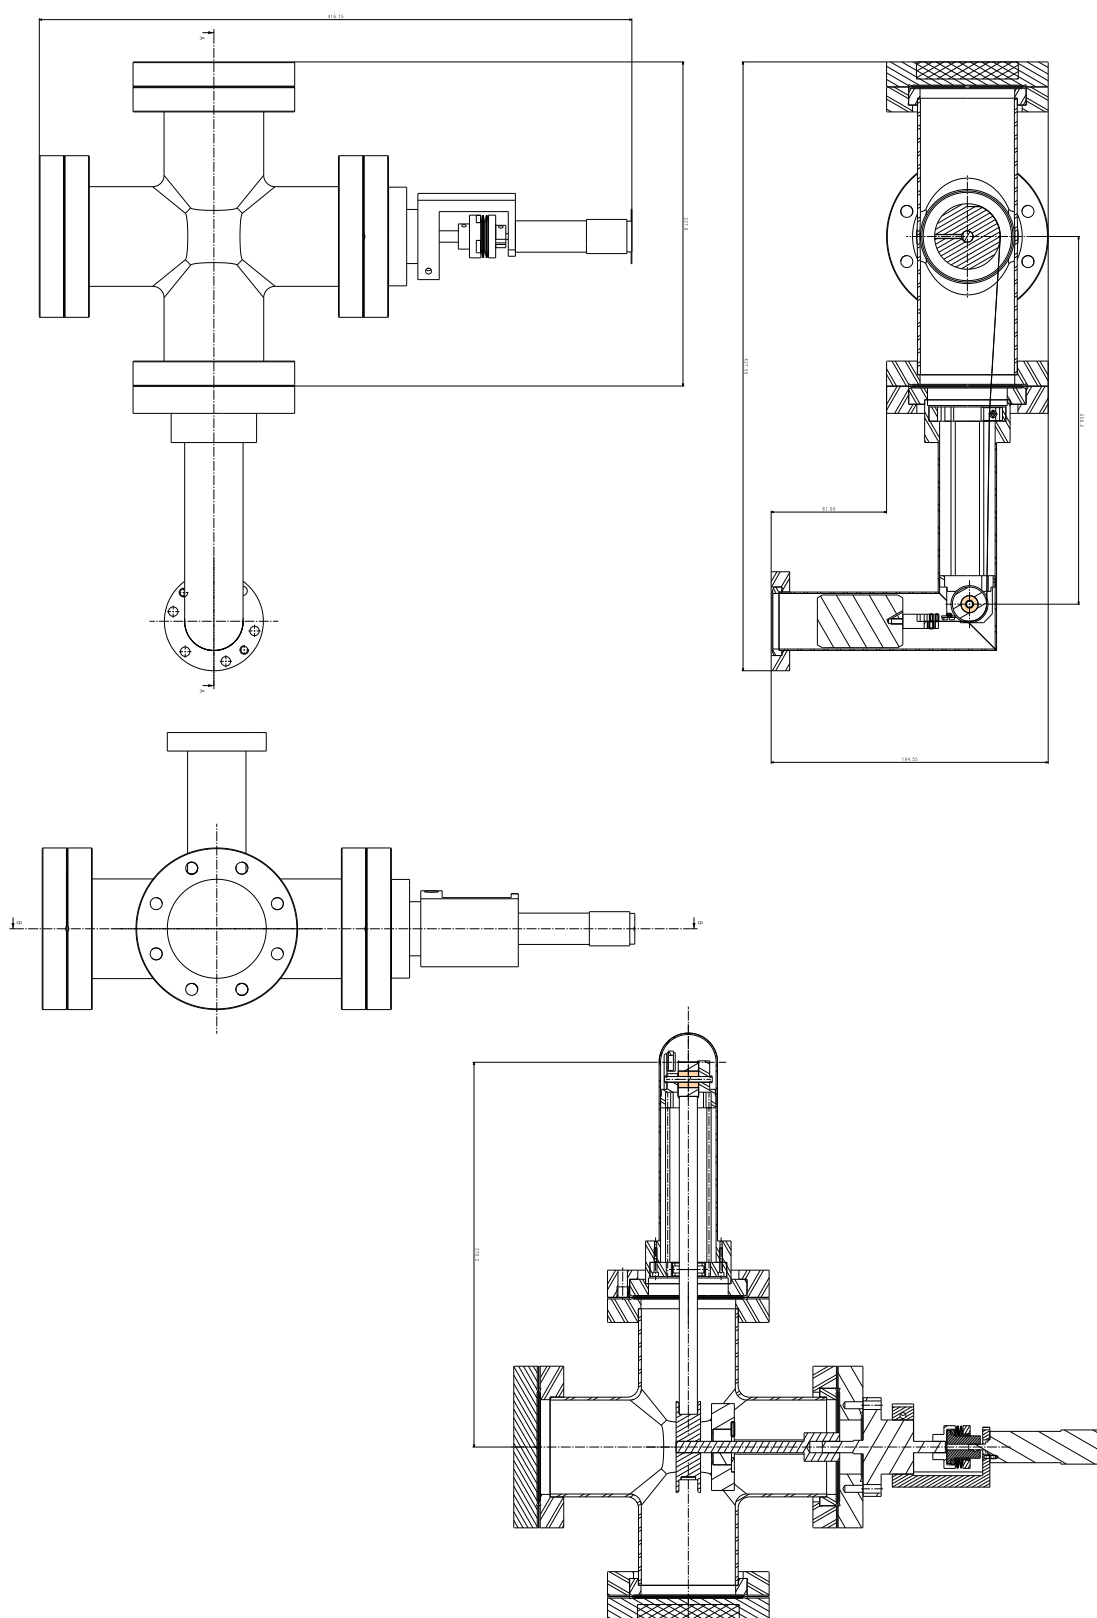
Technical Drawing of the final calibration system. Drawing provided by Kurt Bösiger, UZH.
